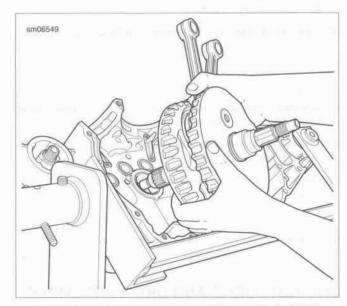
Installing Flywheel Assembly In Right Crankcase
